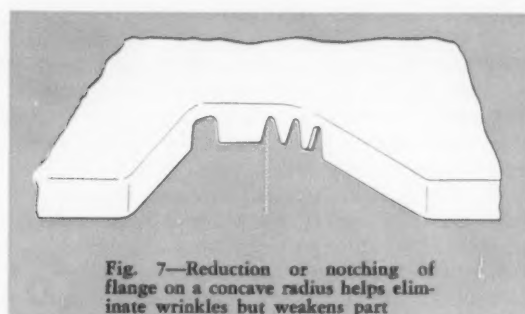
Reduction or notching of flange on a concave radius helps eliminate wrinkles but weakens part
